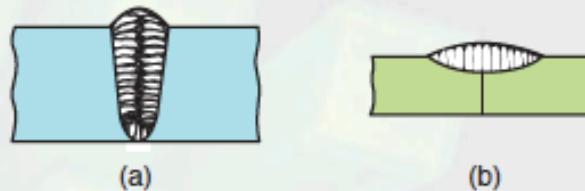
Grain structure in (a) a deep weld and (b) a shallow weld. Note that the grains in the solidified weld metal are perpendicular to their interface with the base metal.
